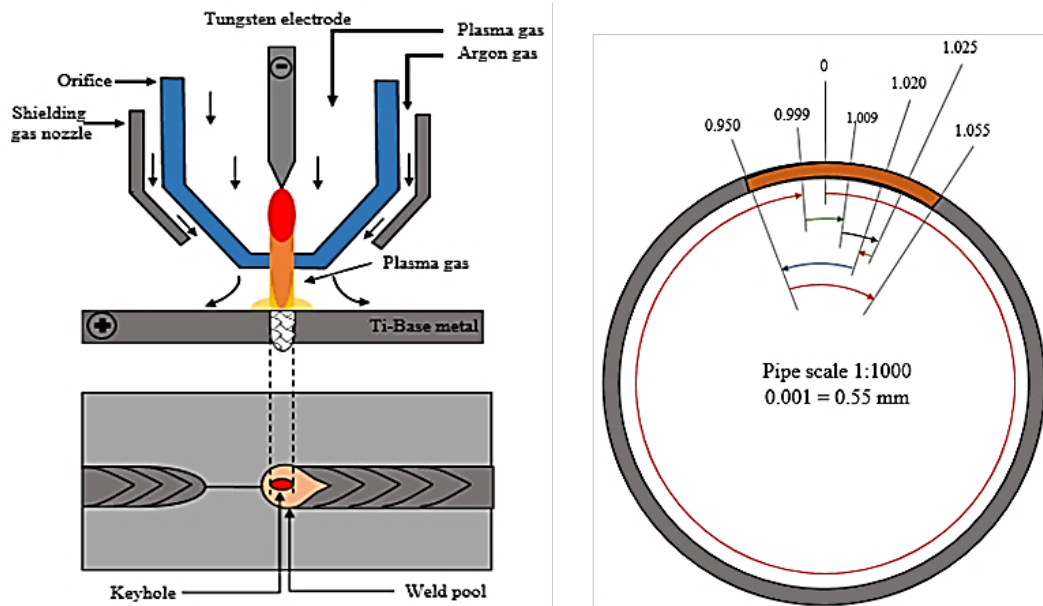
(a) Schematic illustration of the PAW process, (b) Cycle rotating as start/stop welded area
